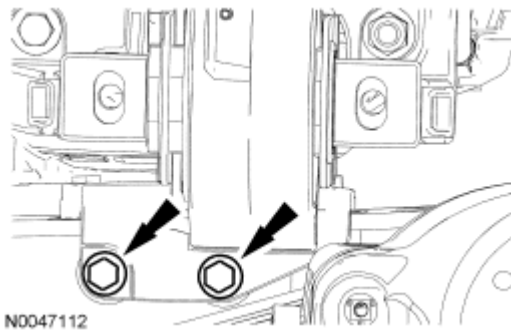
Locating Upper Bolts On Rear Transaxle Insulator
